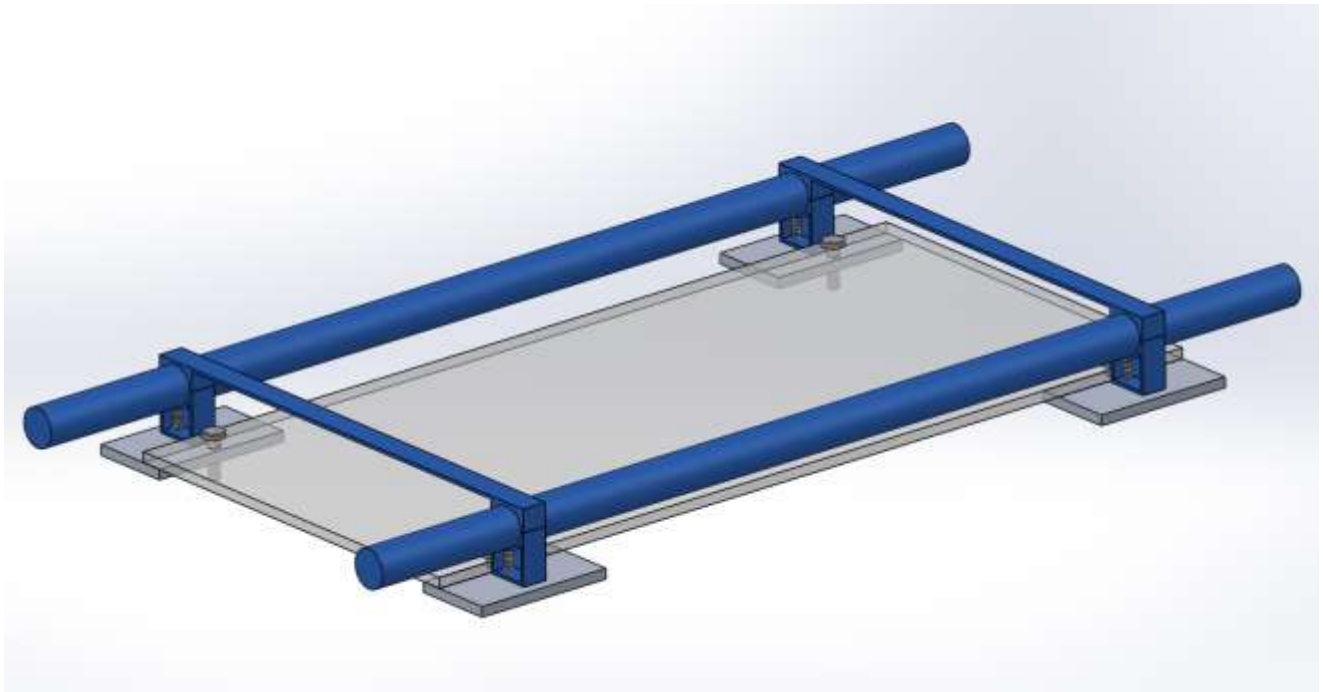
Rectangular mount plate, as it interfaces with the mounting tabs and S1000+ gimbal mounting brackets.
